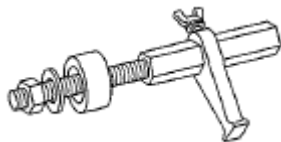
Identifying Transmission Cooler Line Disconnect Tool
